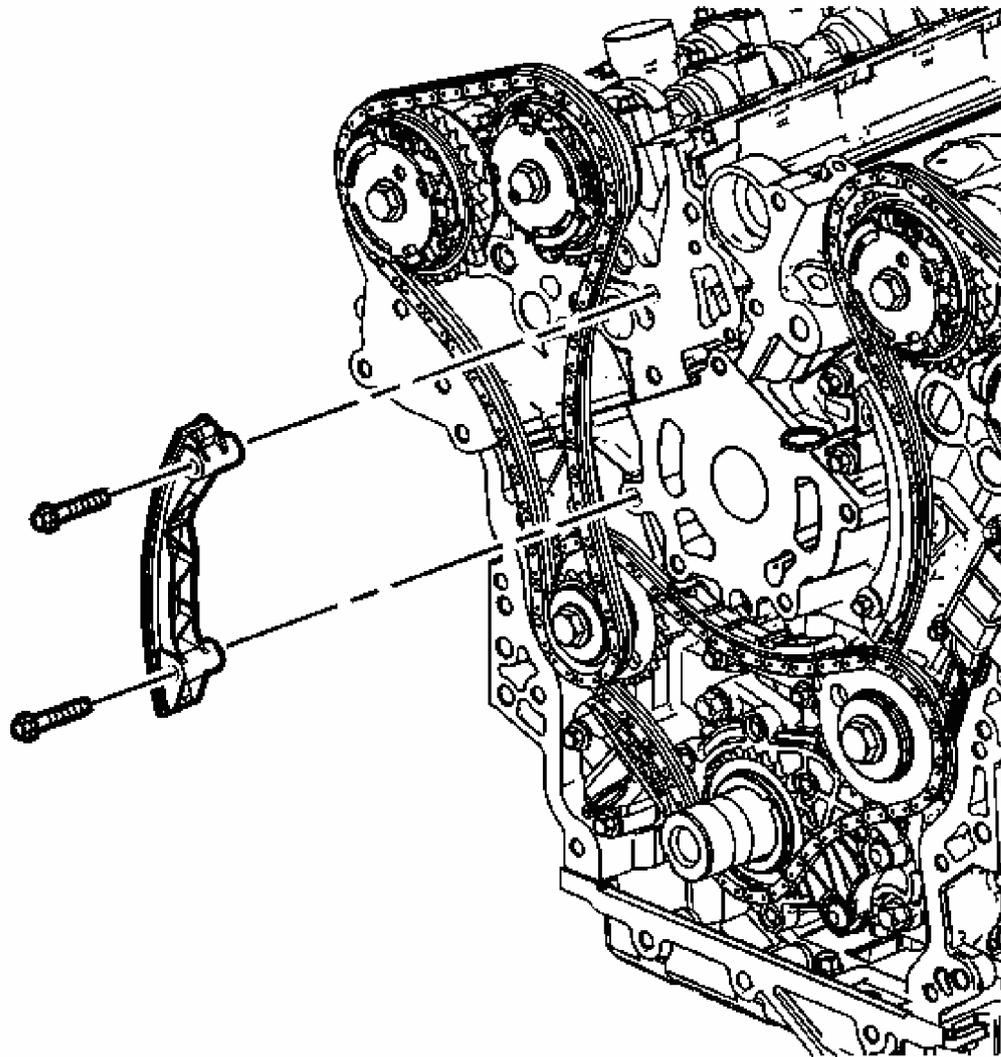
View Of Right Secondary Camshaft Drive Chain Guide & Bolts
